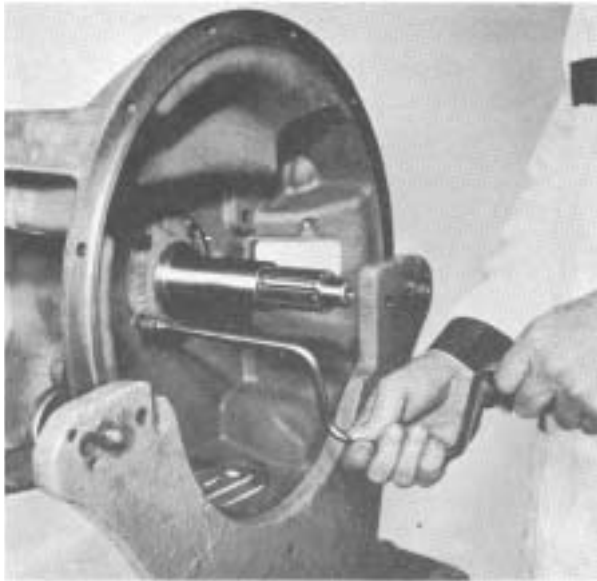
With bearing cap oil return groove lined up with oil hole in transmission case, install bearing cap and bolts. Tighten bolts 15 to 20 ft. lbs. torque [20,4 - 27,1 N,m]
